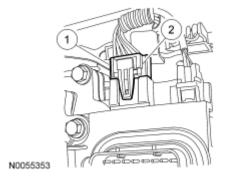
Identifying Coolant Tube Courtesy of FORD MOTOR CO.
